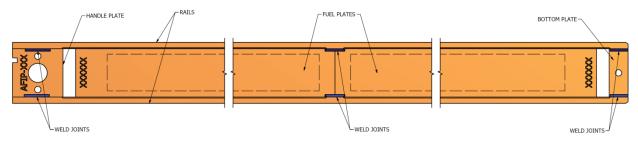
AFIP-1 through -3 Fuel Plate Frame Assembly
